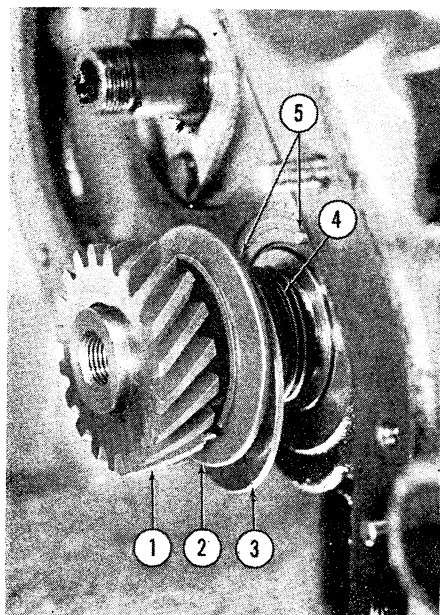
Adjusting crankshaft end play on Continental N62. Shims (4) are varied to obtain .003-.007 end play. Locate bronze washer (3) on dowels (5) before driving thrust plate (2) and crank gear (1) in position.
